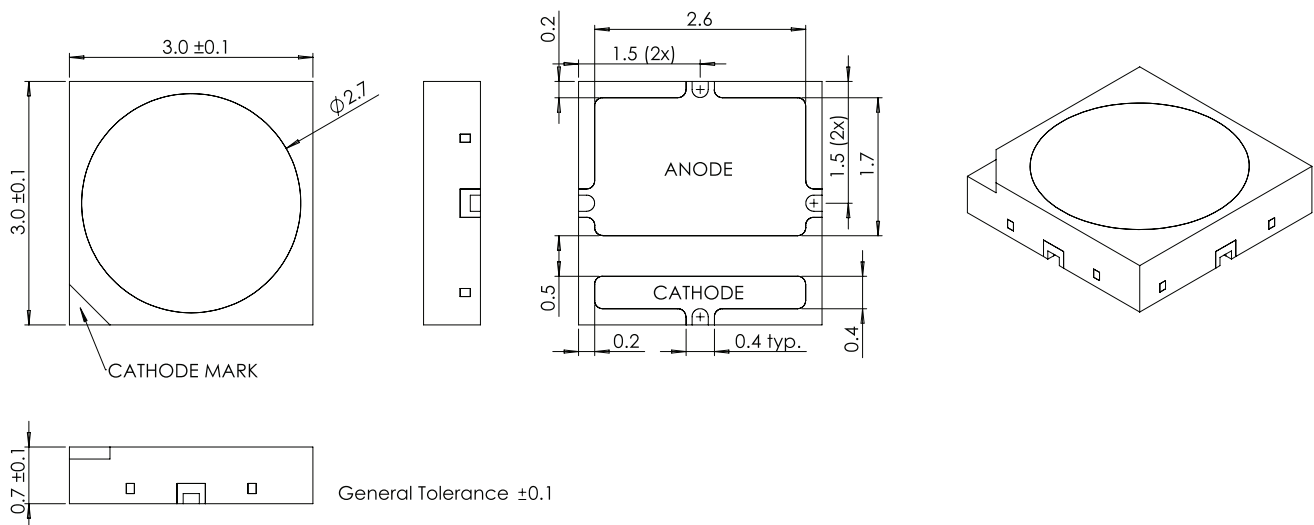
Mechanical dimensions for LUXEON Versat 3030 HP 700
